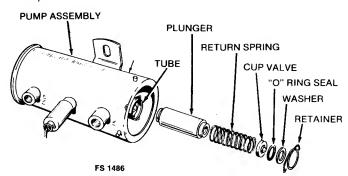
REMOVAL OF PLUNGER ASSEMBLY
